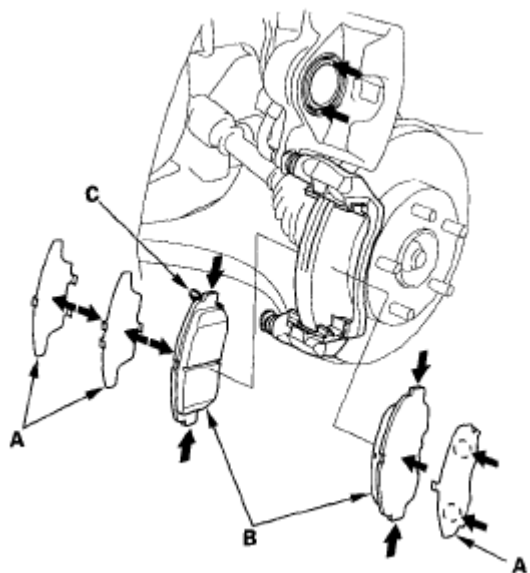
Applying Assembly Paste To Pad Shims And Brake Pads
